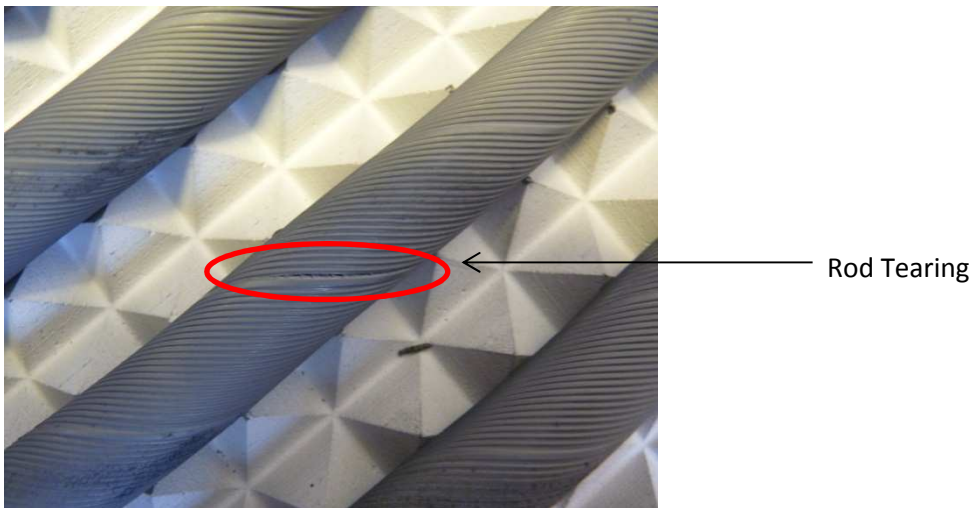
Rifle crack in extruded WC-Co part (rod tearing)
